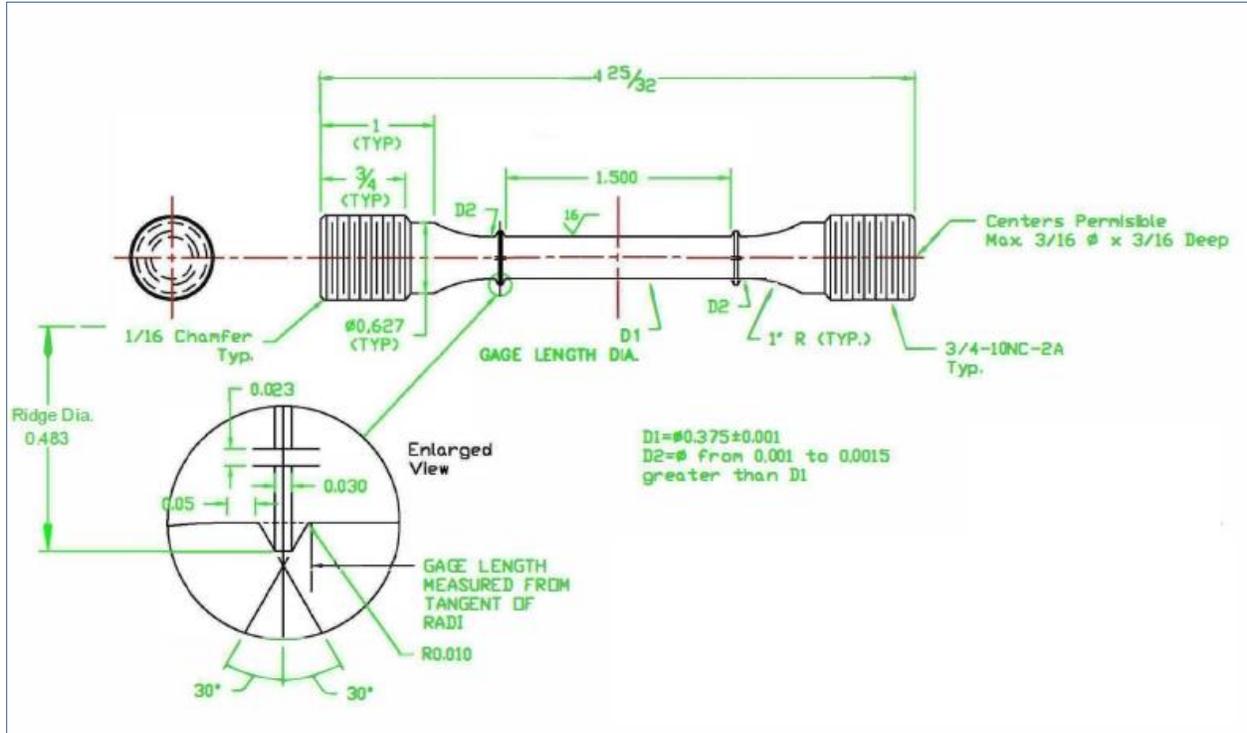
Drawing used in machining Alloy 709 specimen (dimensions are in inches).
